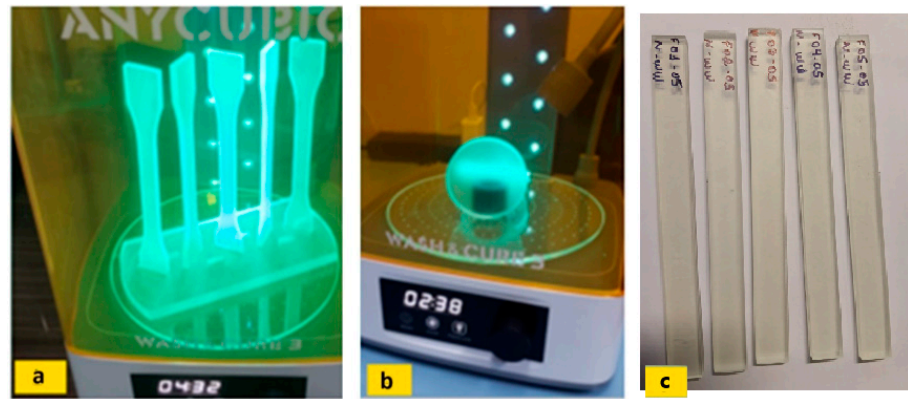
Wash and cure machine, parts exposed to ultraviolet light: (a) tensile test specimen, (b) disk, (c) flexural test specimen after treatment.
